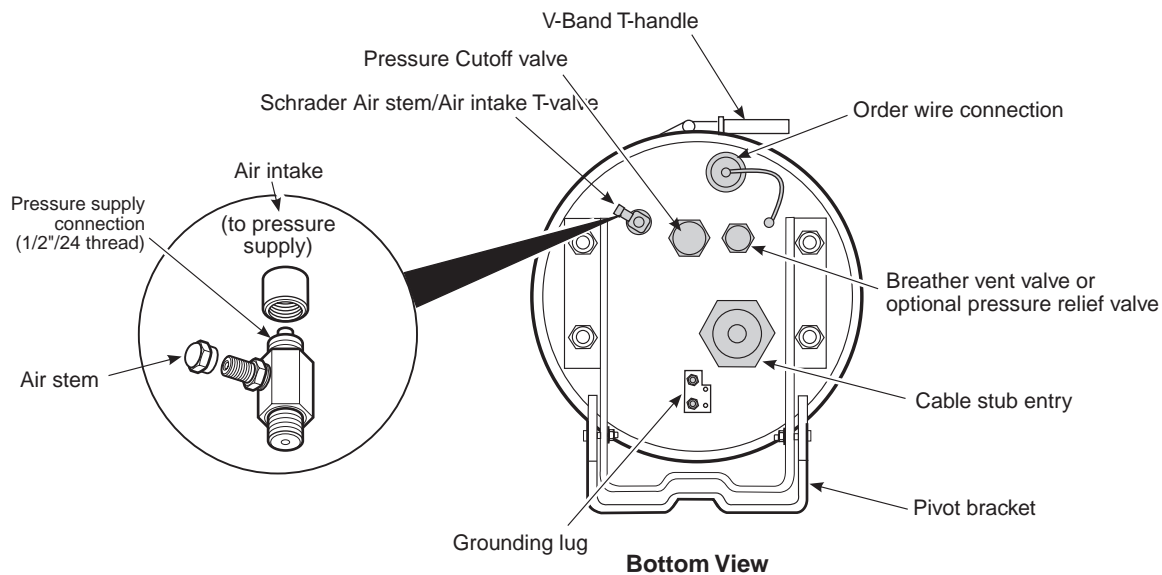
HRE-712 List 1 Remote Gel-Filled Enclosure
